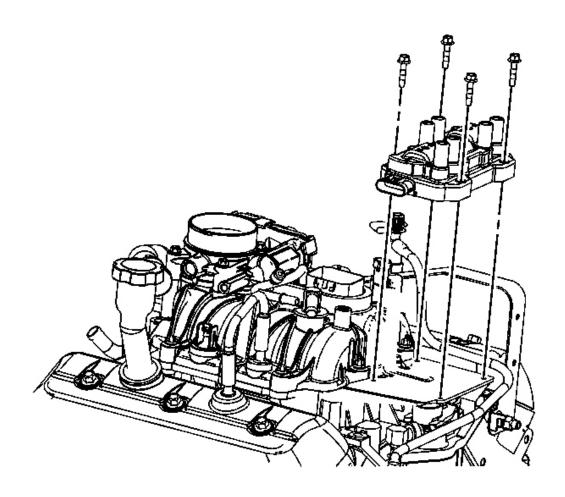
View Of Ignition Coil & Bolts Courtesy of GENERAL MOTORS CORP.
